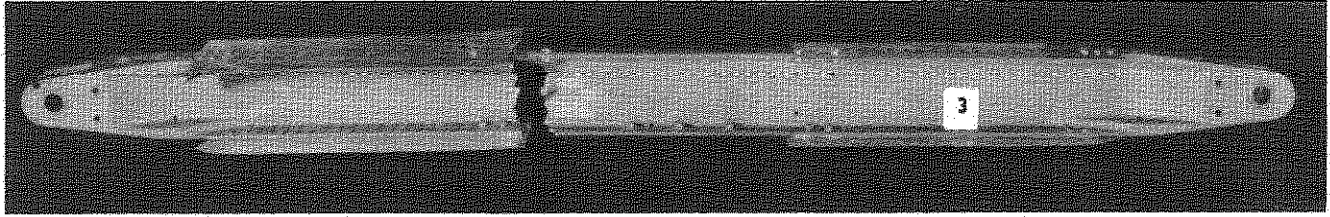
FRACTURED CHANNEL SPECIMEN (APPENDIX 3)
